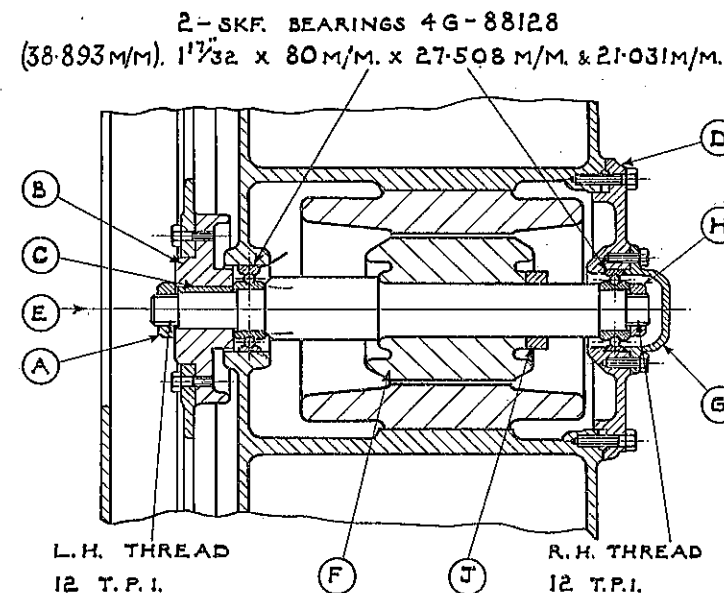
SECTION THROUGH BOTTOM PULLEY SPINDLE.
